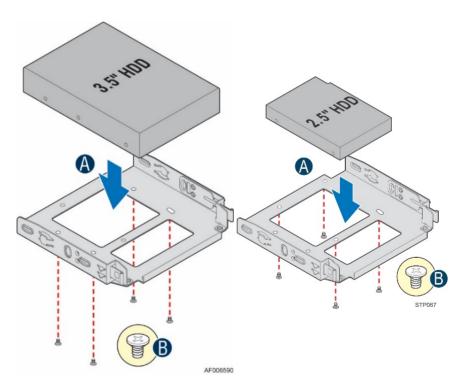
Securing 3.5"/2.5" Drives on a Fixed Drive Bay
